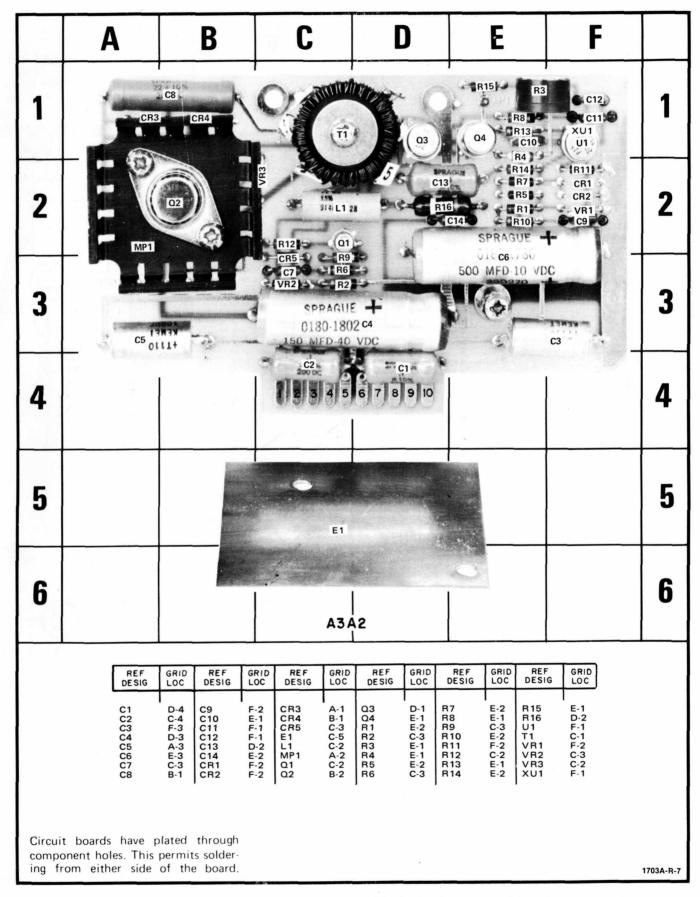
Low Voltage Converter Assembly A3A2 Component Identification
